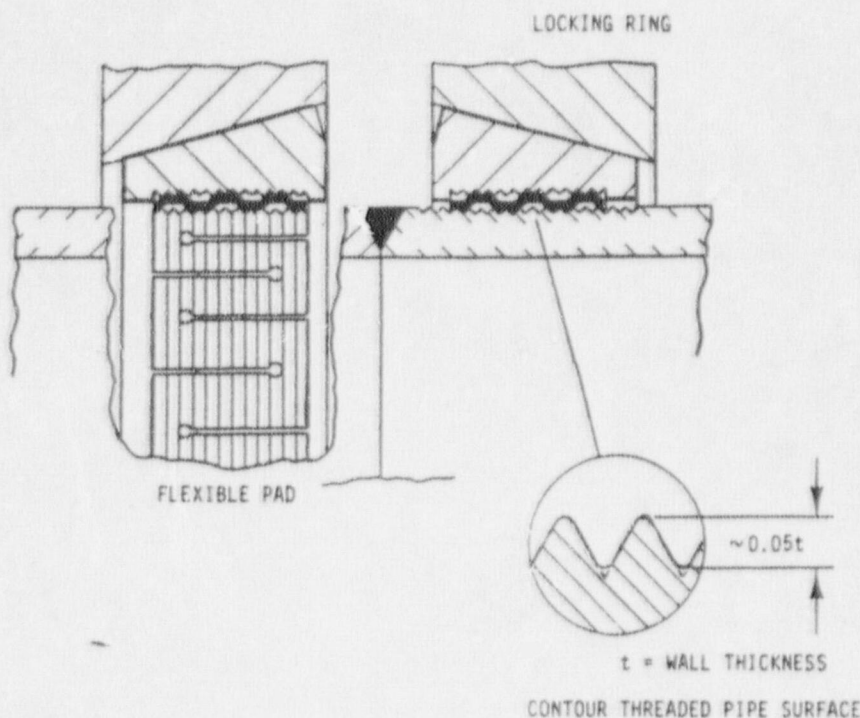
Contour thread on pipe surface with flexible pad as axial retainer of locking rings.
